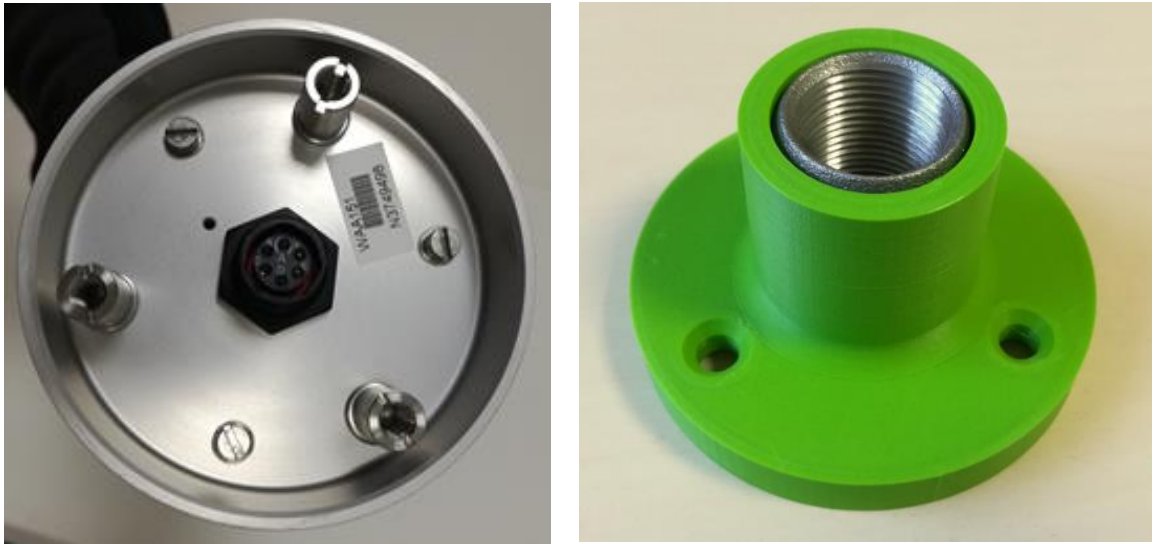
Anemometer bottom and the connecting flange to a ¼" pipe thread
